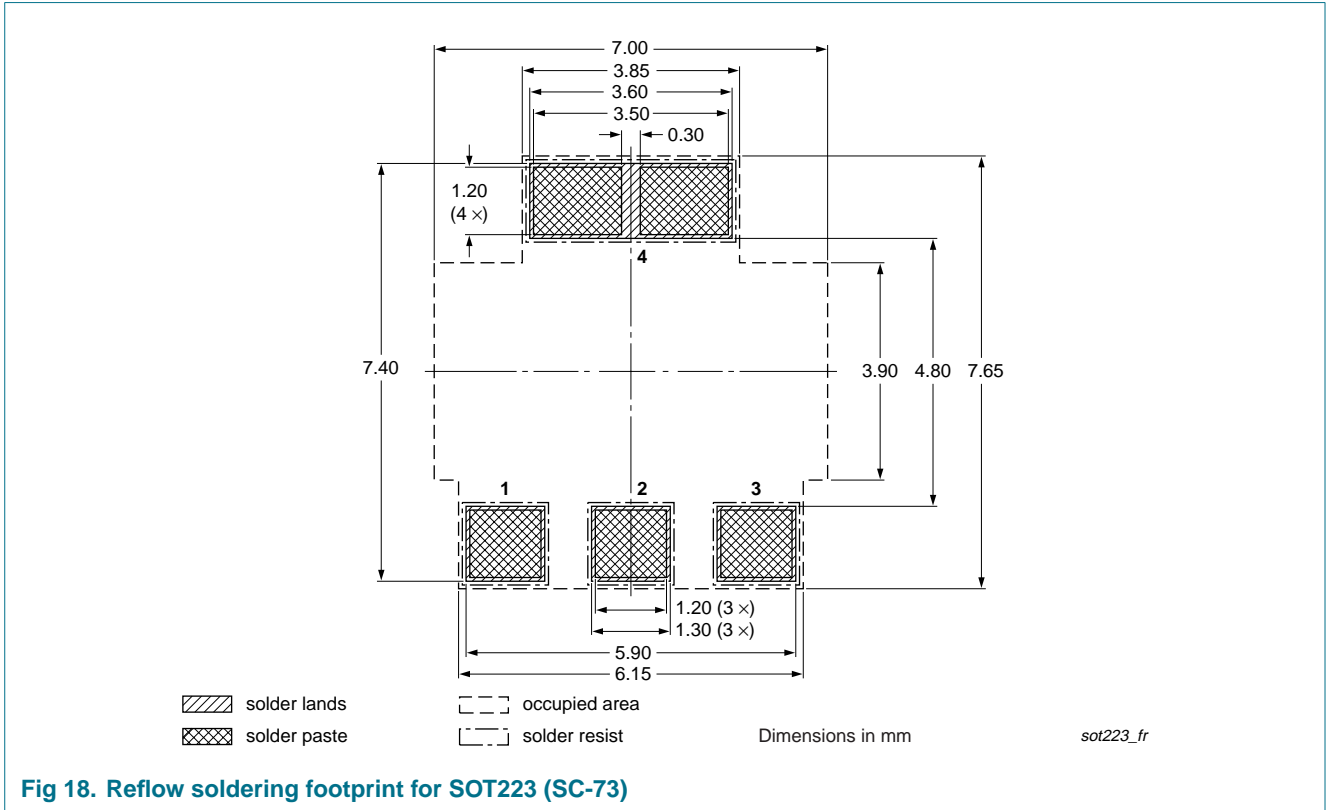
Reflow soldering footprint for SOT223 (SC-73)
